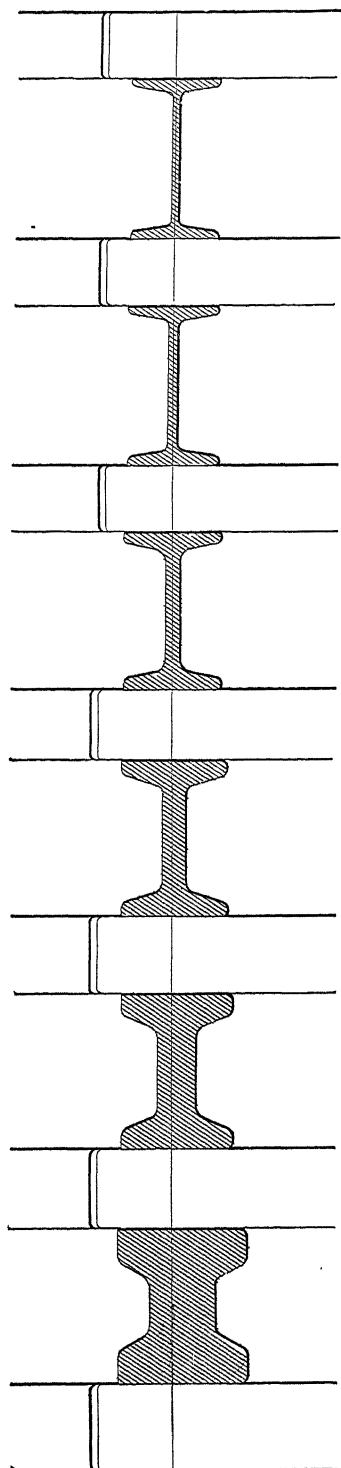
SHOWING METHOD OF ROLLING A 6-IN. BEAM.
